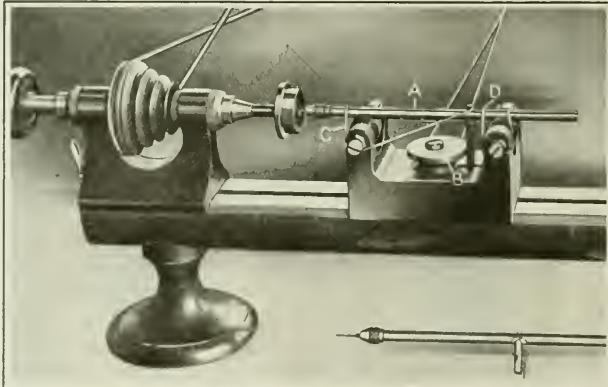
Set-up of Bench Lathe used in lapping the Drawing Hole in the Diamond
